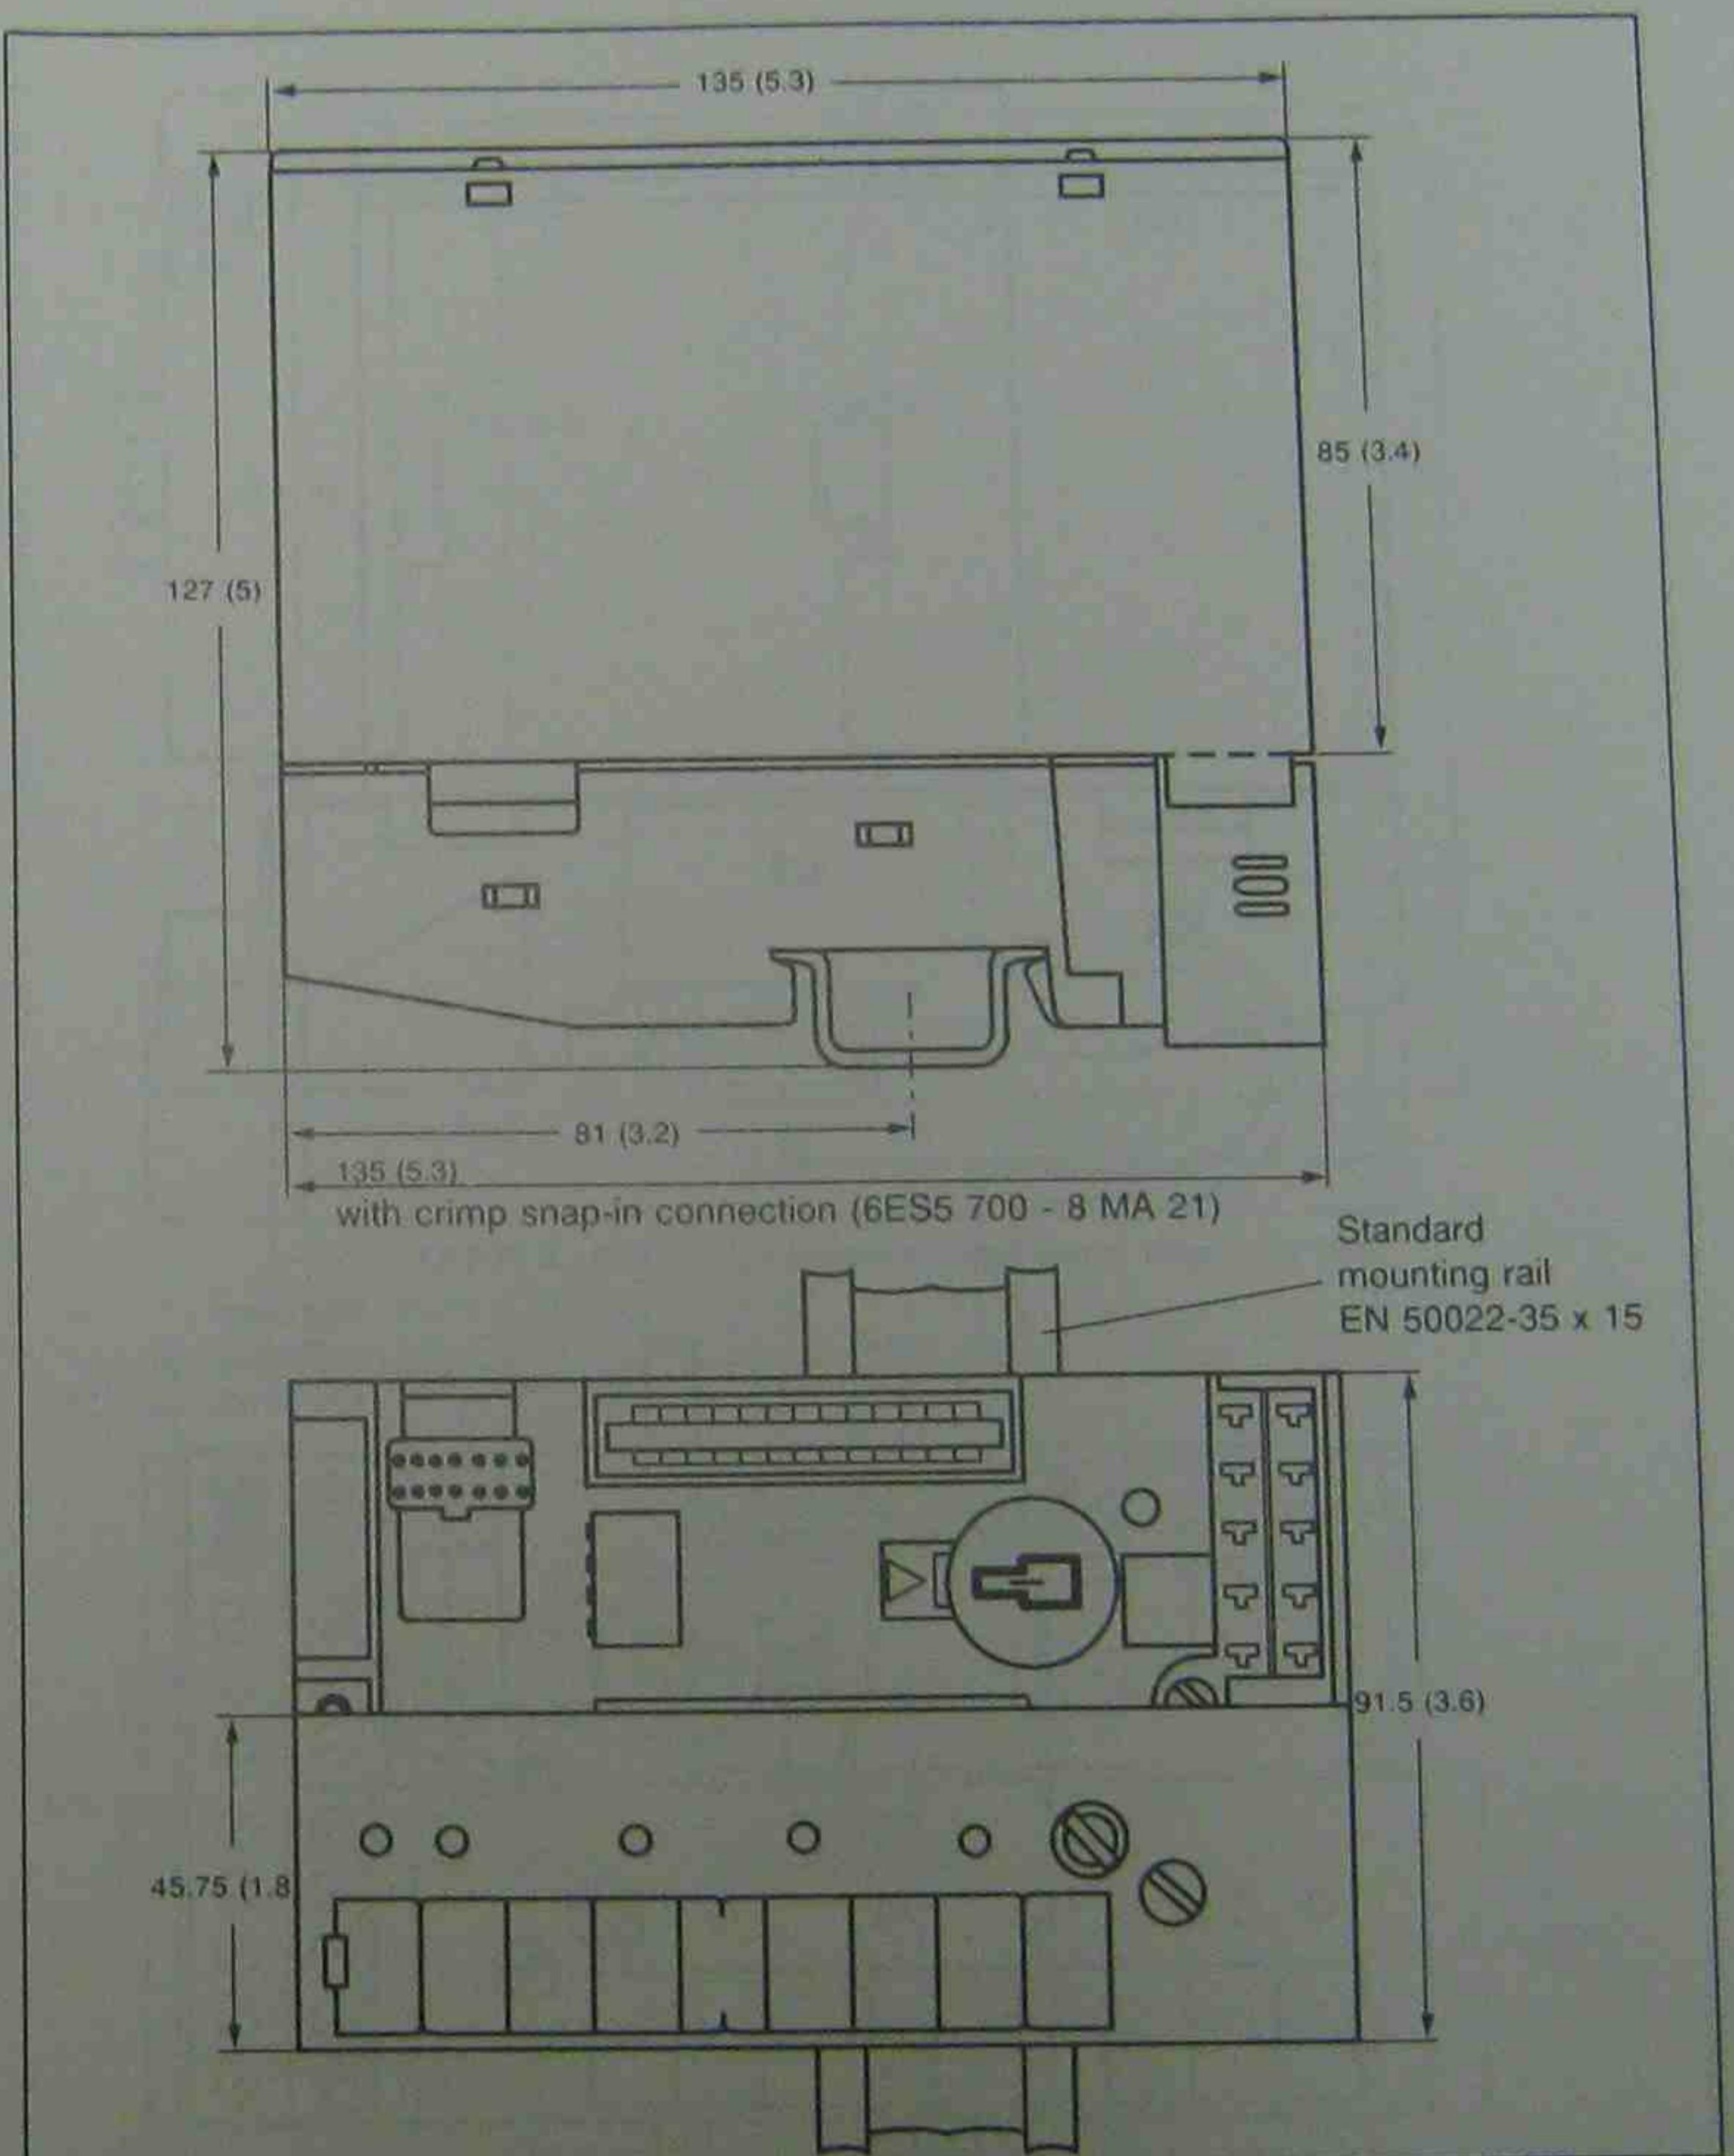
Dimension Drawing of the Bus Unit (Crimp Snap-in Connections) with I/O Module
